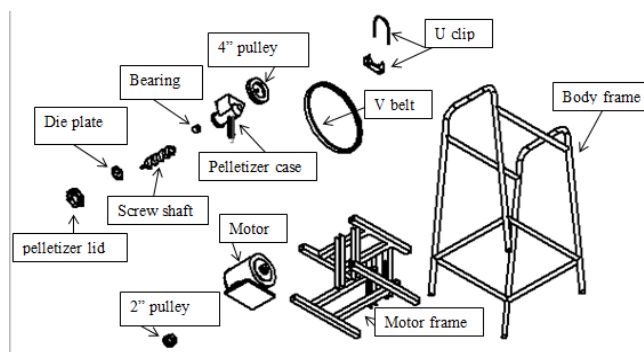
The exploded view of the lab-scale pelletizer machine.
